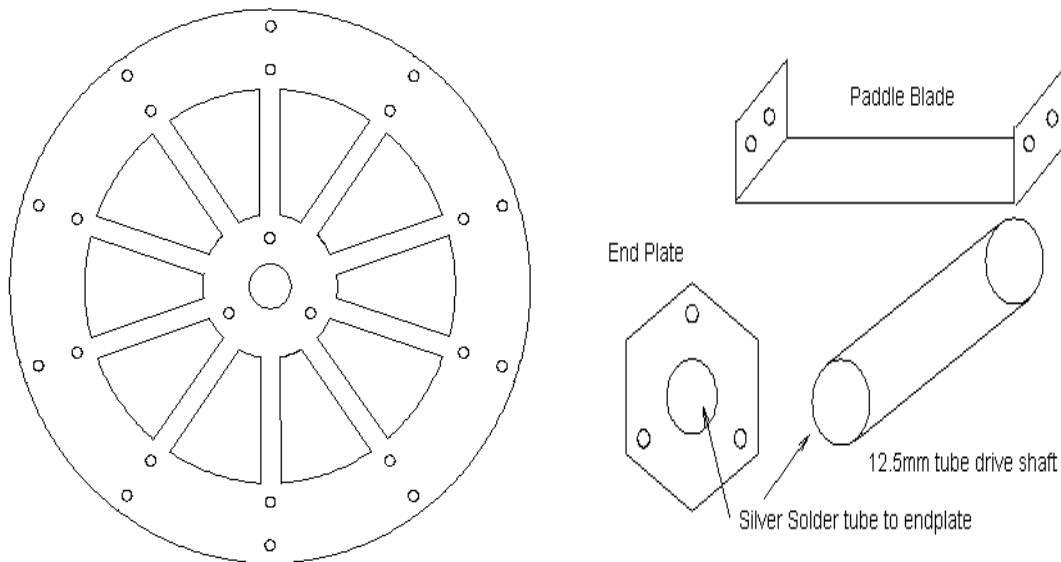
A Paddlewheel Rim & One Paddle Blade & Endplate
